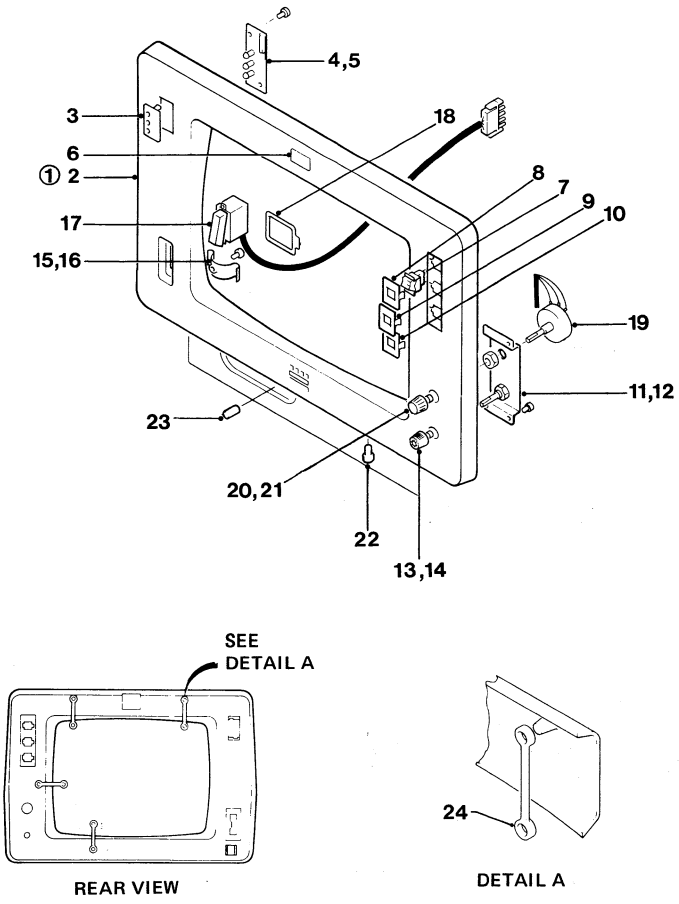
(Sheet 1 of 4). Front Enclosure Assembly
